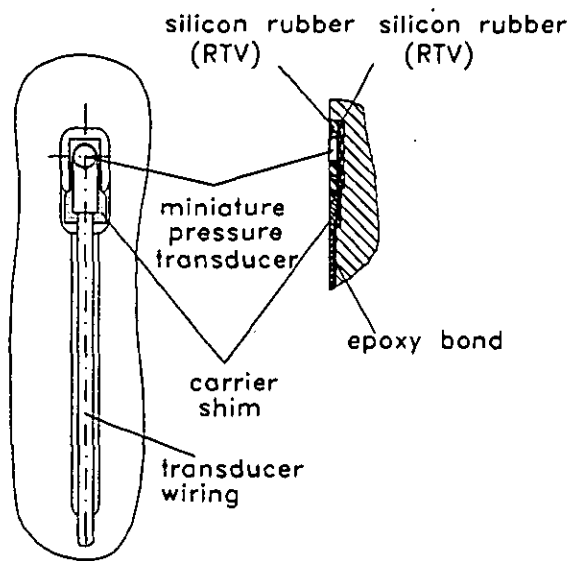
Rotor blade with embedded miniature pressure transducers for unsteady surface pressure recording
